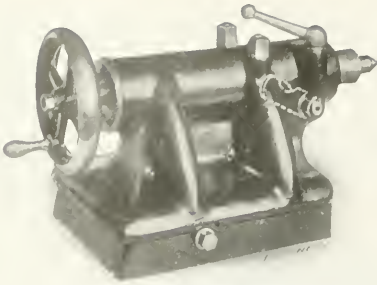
Tailstock of Lehmann Lathe, showing Improved Spindle Locking Device
